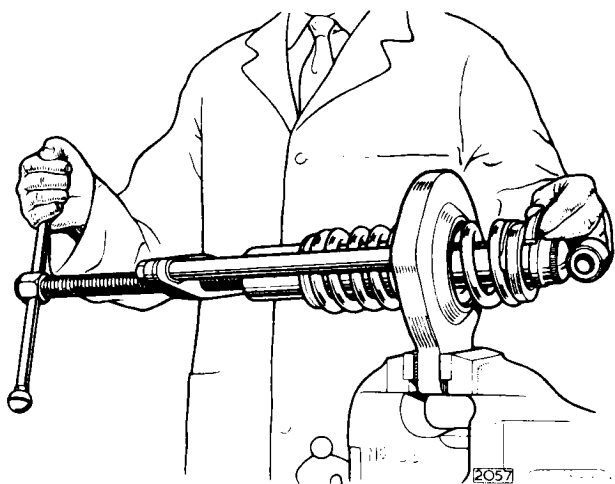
Removing the rear road spring from the hydraulic damper with Churchill tool J.11 in conjunction with SL.14
